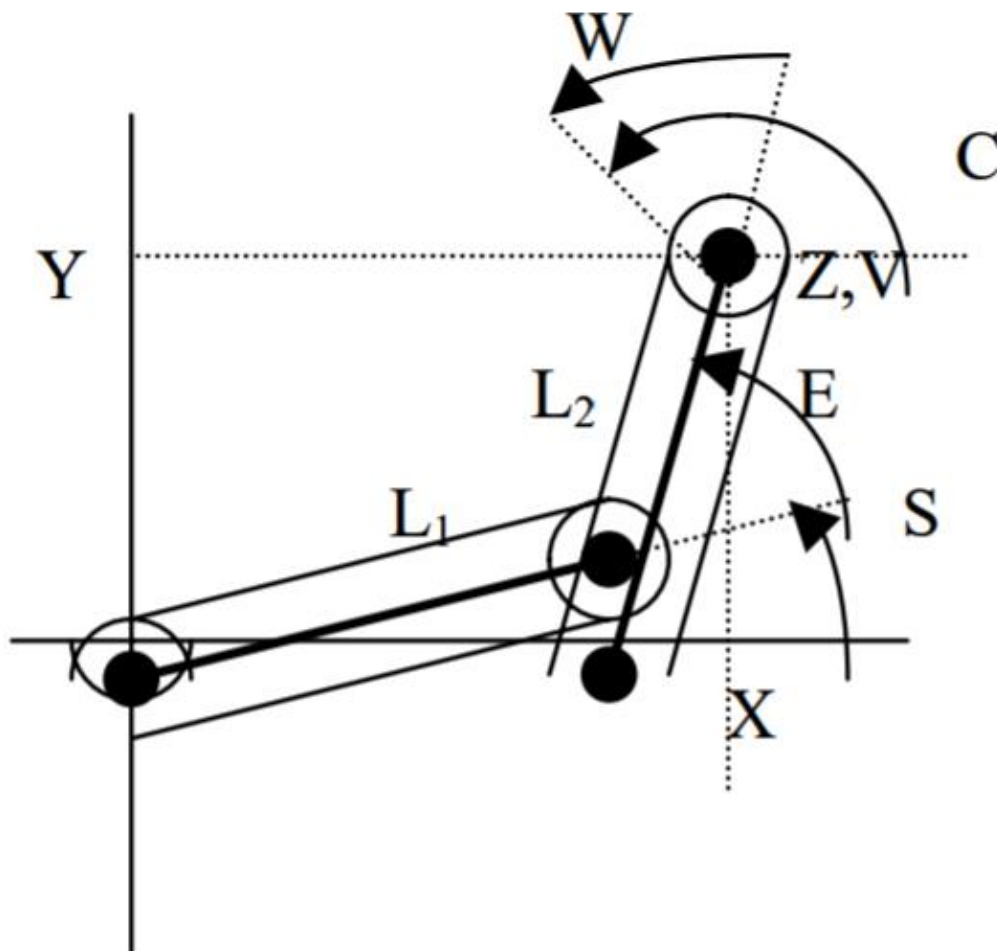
Scheme of the top view of the mechanism
